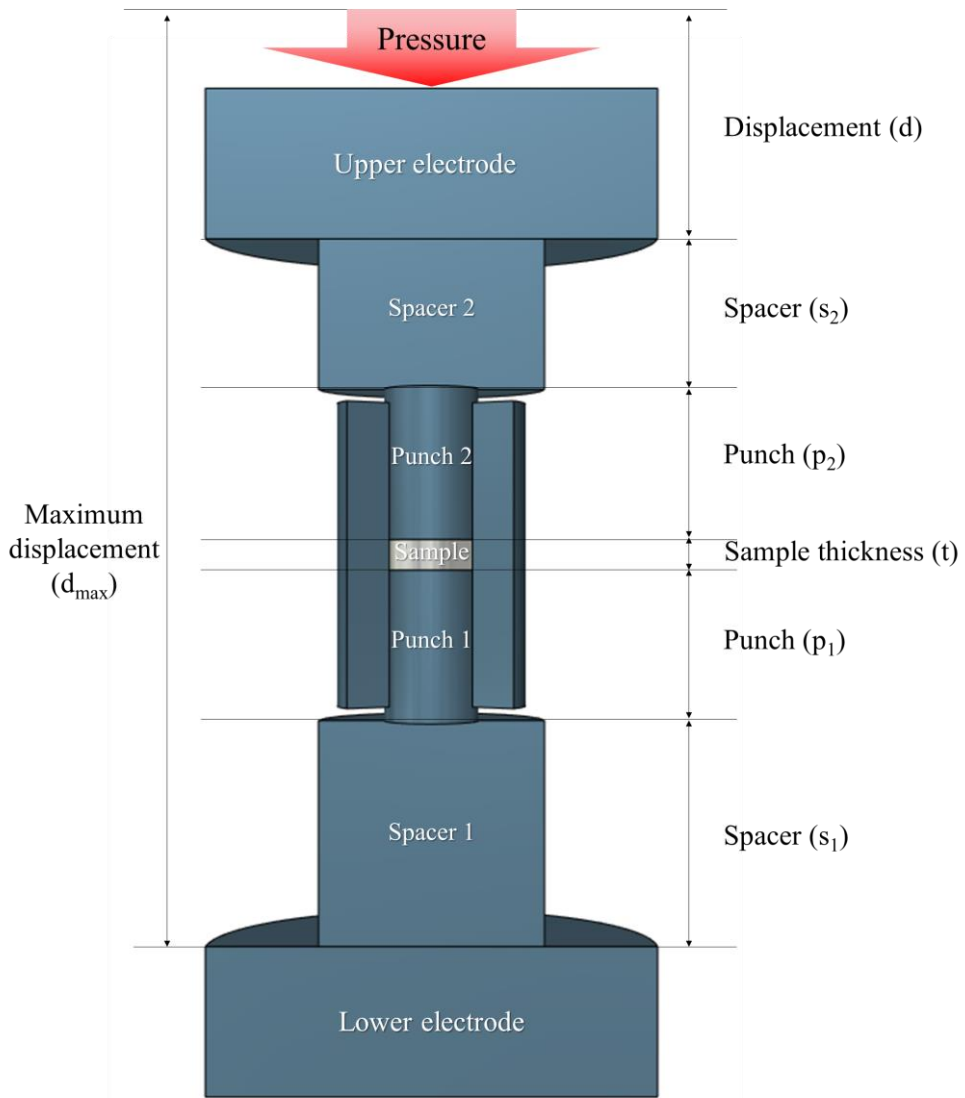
Schematic of test setup featuring a mold mounted on an SPS machine.
